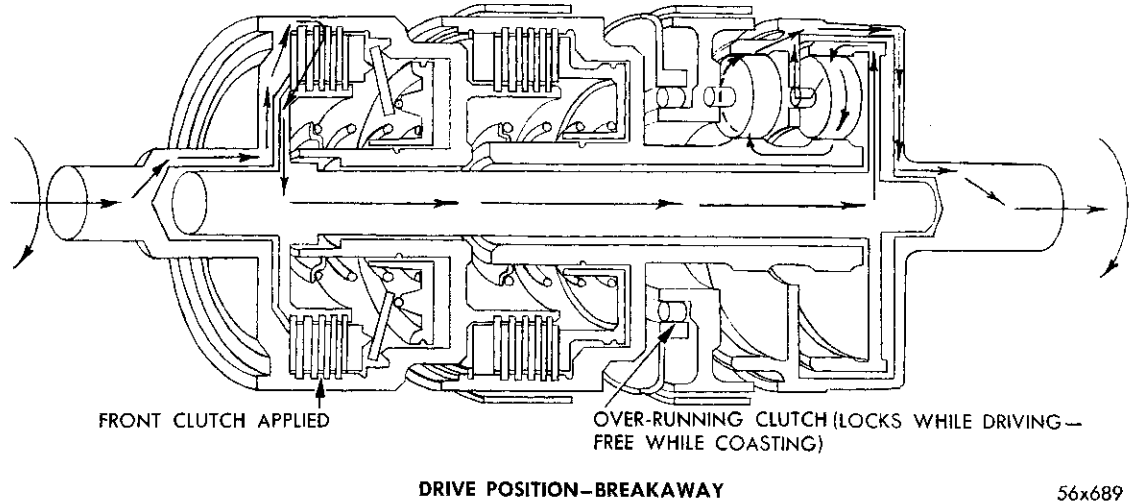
Power Flow in D (Drive) Position—Breakaway
